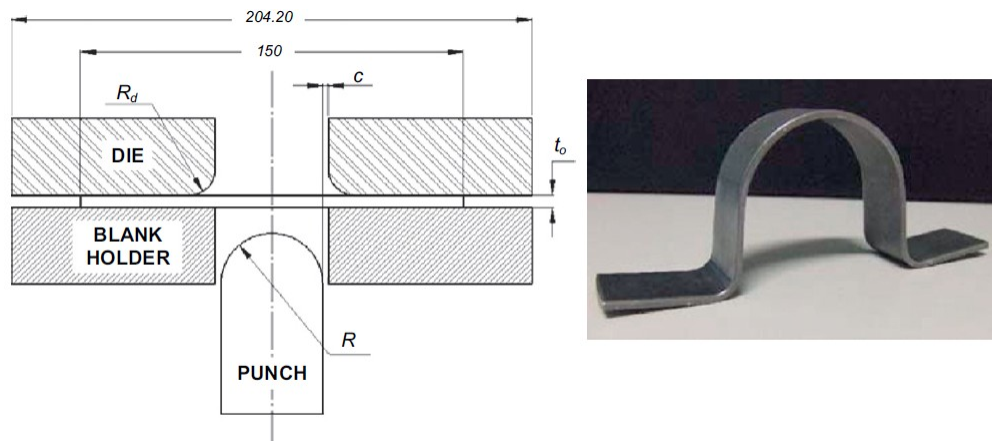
U-drawing test schematic representation (Souza and Rolfe, 2010). In this test, a U-shape geometry punch has been used for the forming step.
